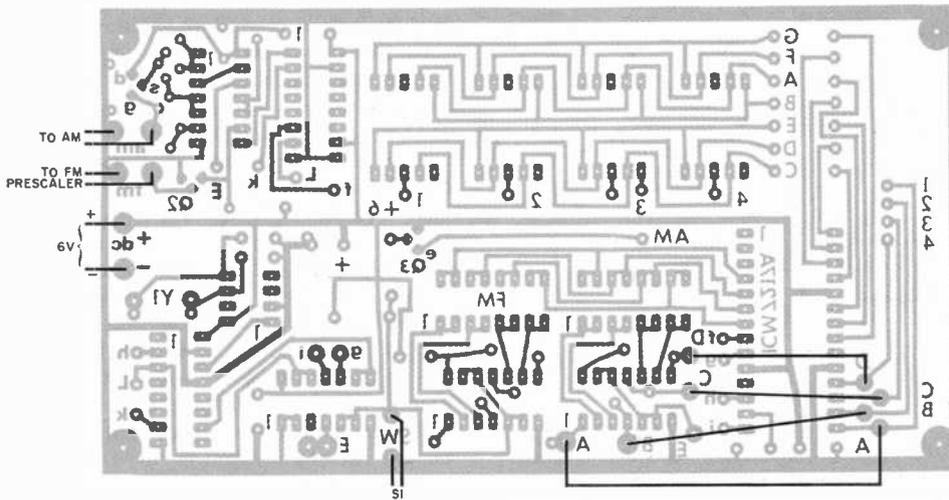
At left and below are additional jumpers of insulated wire to be installed on the display board. Use RG-174 coaxial cable to make the connections off the board.
